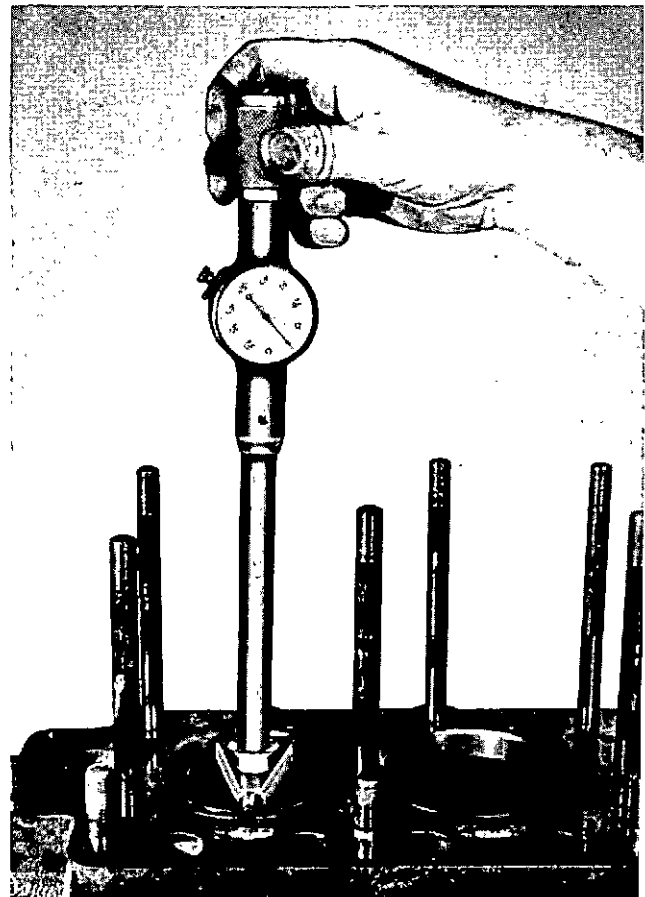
Measuring Original Diameter of Sleeve with Bore Gauge
